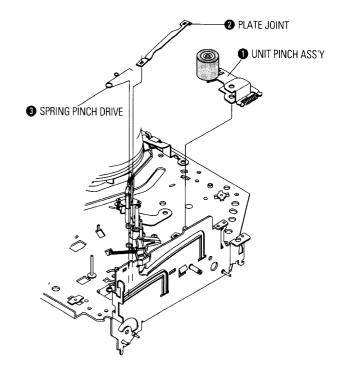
Unit Pinch Ass'y, Plate Joint, Spring Pinch Drive Removal
